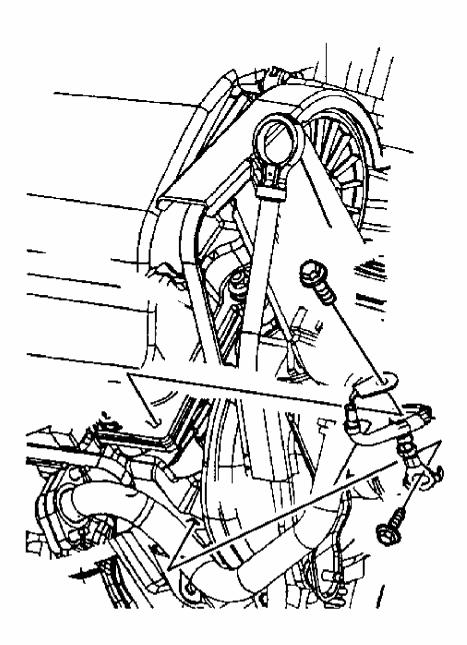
Identifying Left Camshaft Cover Ignition Coil Ground Strap Bolt Courtesy of GENERAL MOTORS CORP.
